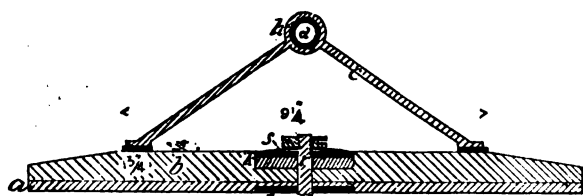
SECTION THROUGH DISK & HORIZONTAL BRACES
